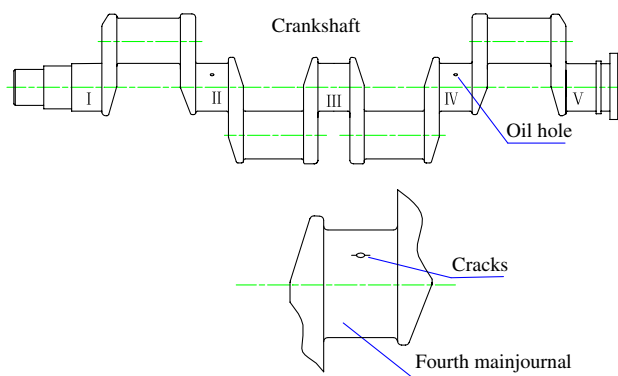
Schematic illustration of crankshaft and cracks on the fourth main journal.
